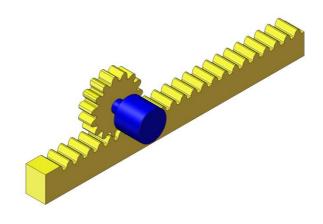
Example of using a rack and pinion to drive a potentiometer.
